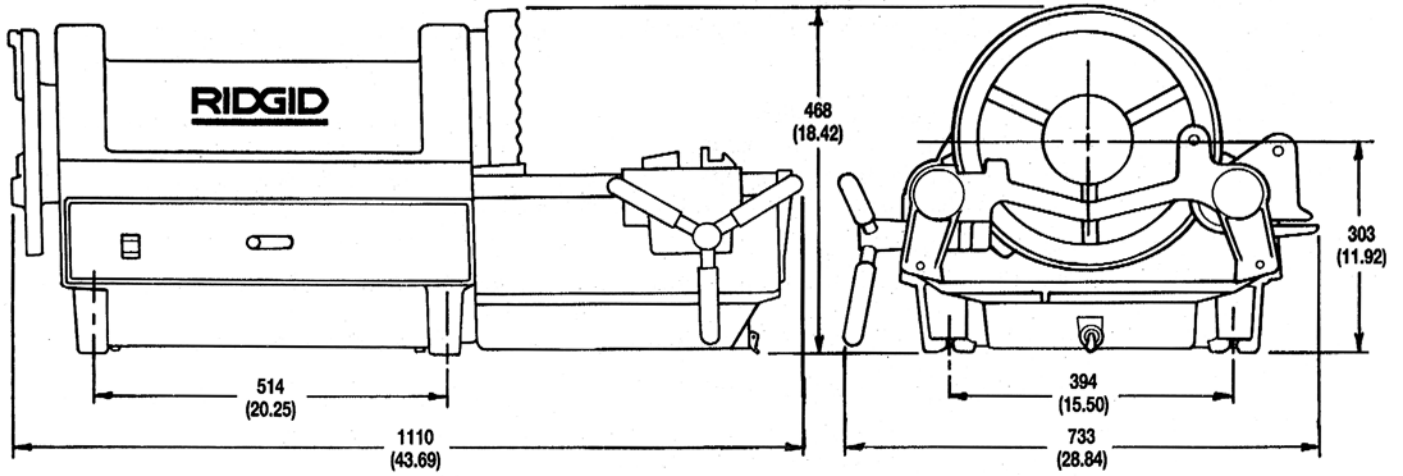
1224 Machine Dimensions - mm (inches)
